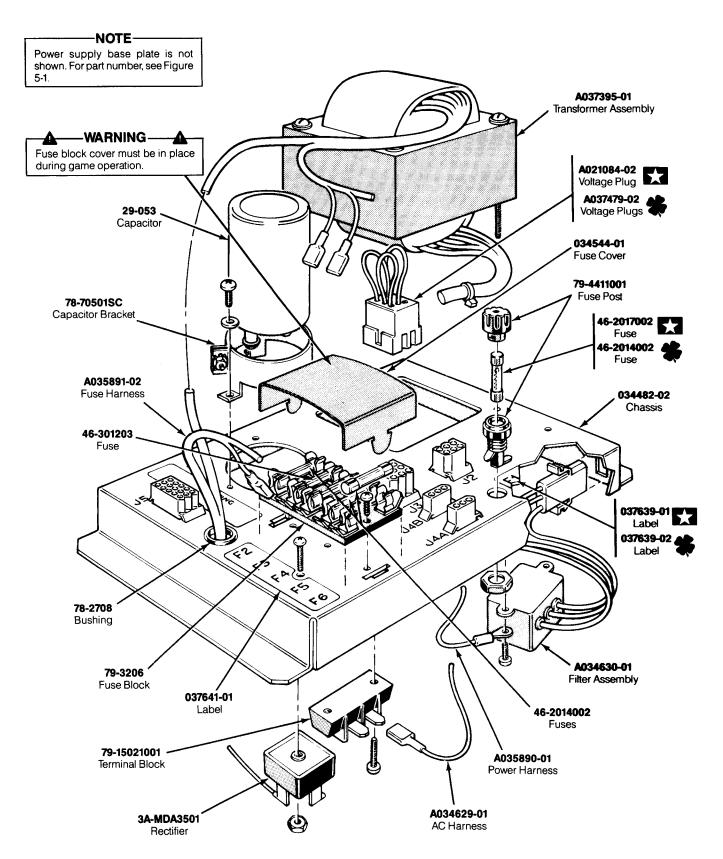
Power Supply Assembly US-Built A037396-04 F Ireland-Built A037396-06 F
